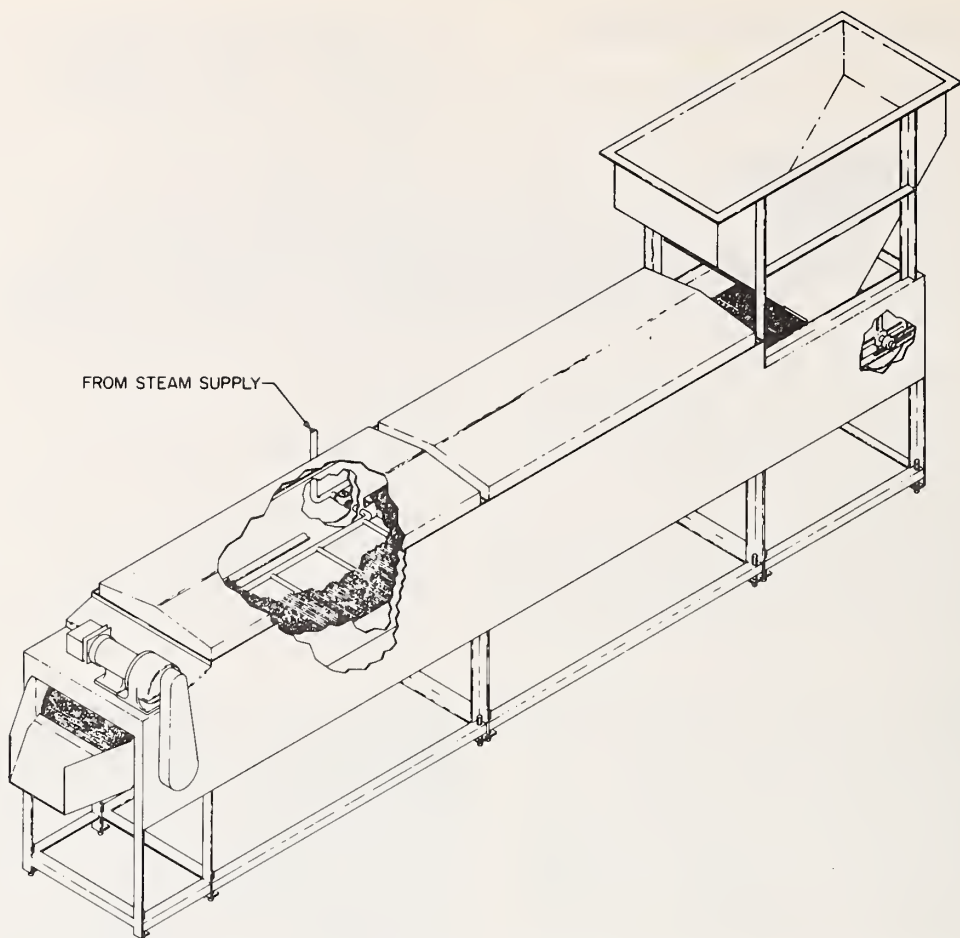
Perspective drawing of steam conditioner. The cutaway in the sidewall under the hopper shows the conveyor-belt adjustment. The near cutaway shows the arrangement of steam pipes under the conveyor belt.
